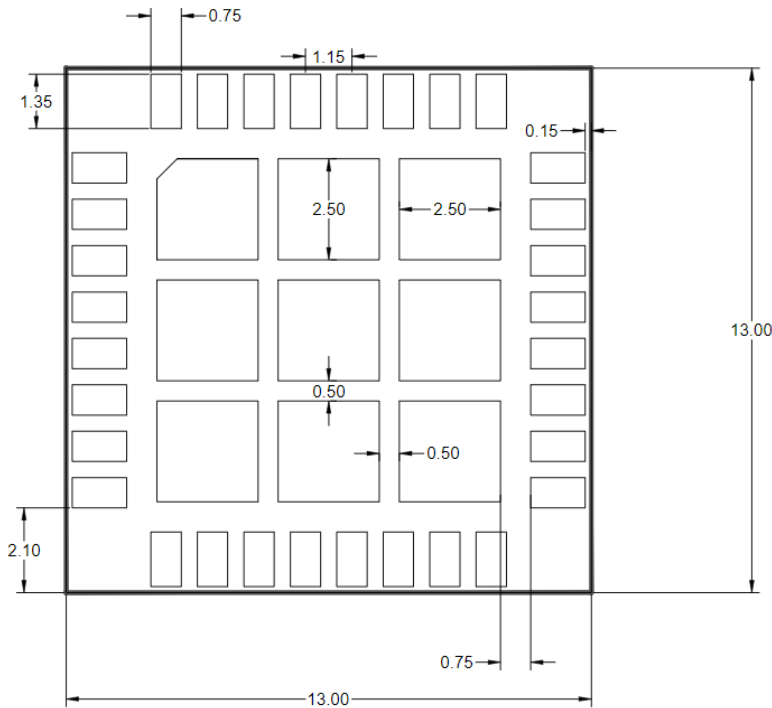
Recommended PCB footprint for shielded HTNB32L-XXX.
